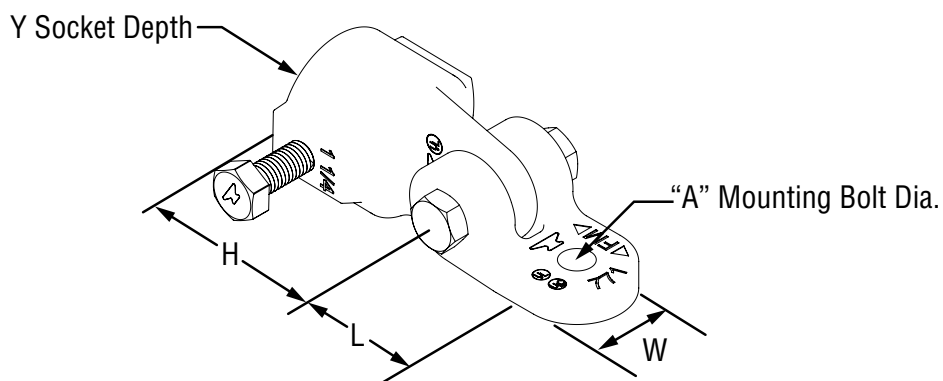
WEIGHT (LBS) • DIMENSIONS (IN)
